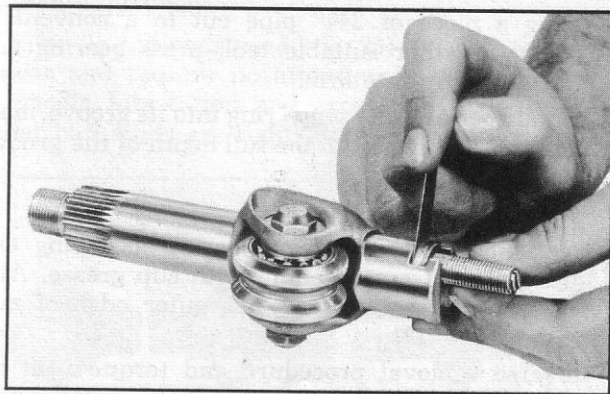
Checking Sector Shaft Lash Adjuster End Clearance
